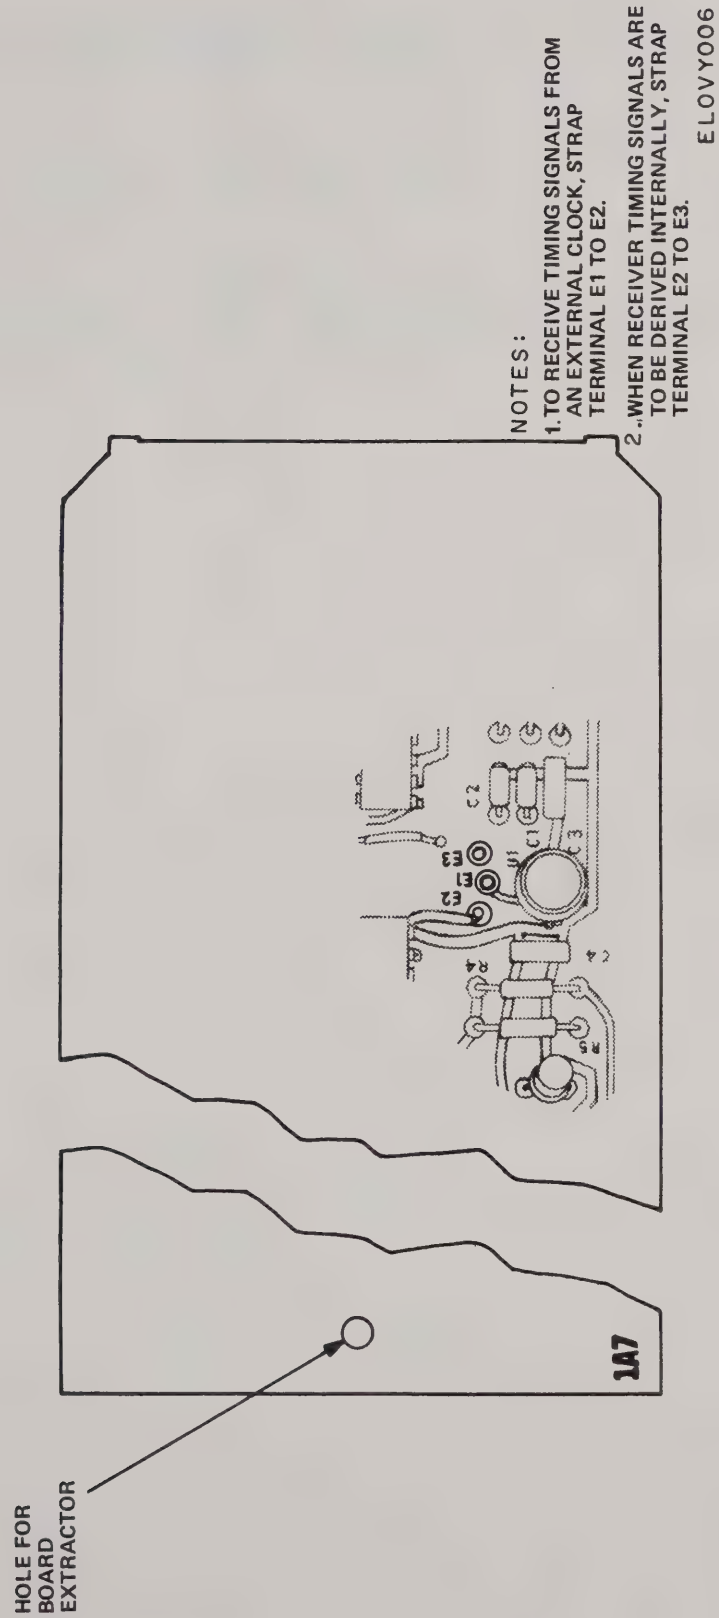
Printed wiring board 1A7 strapping terminals E1, E2, and E3.
